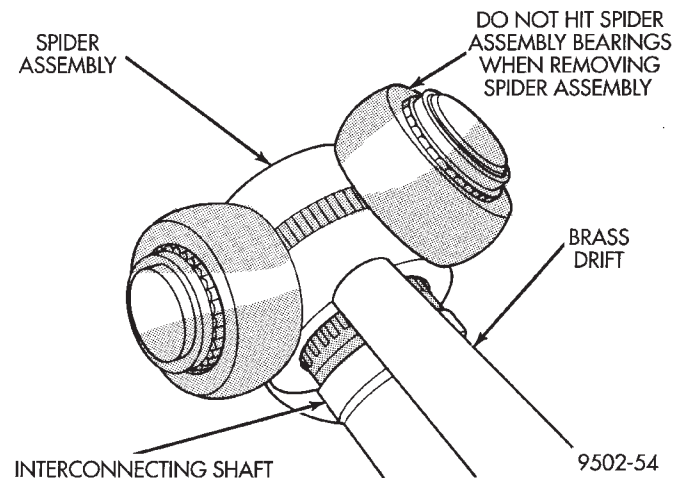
Spider Assembly Removal from Interconnecting Shaft
